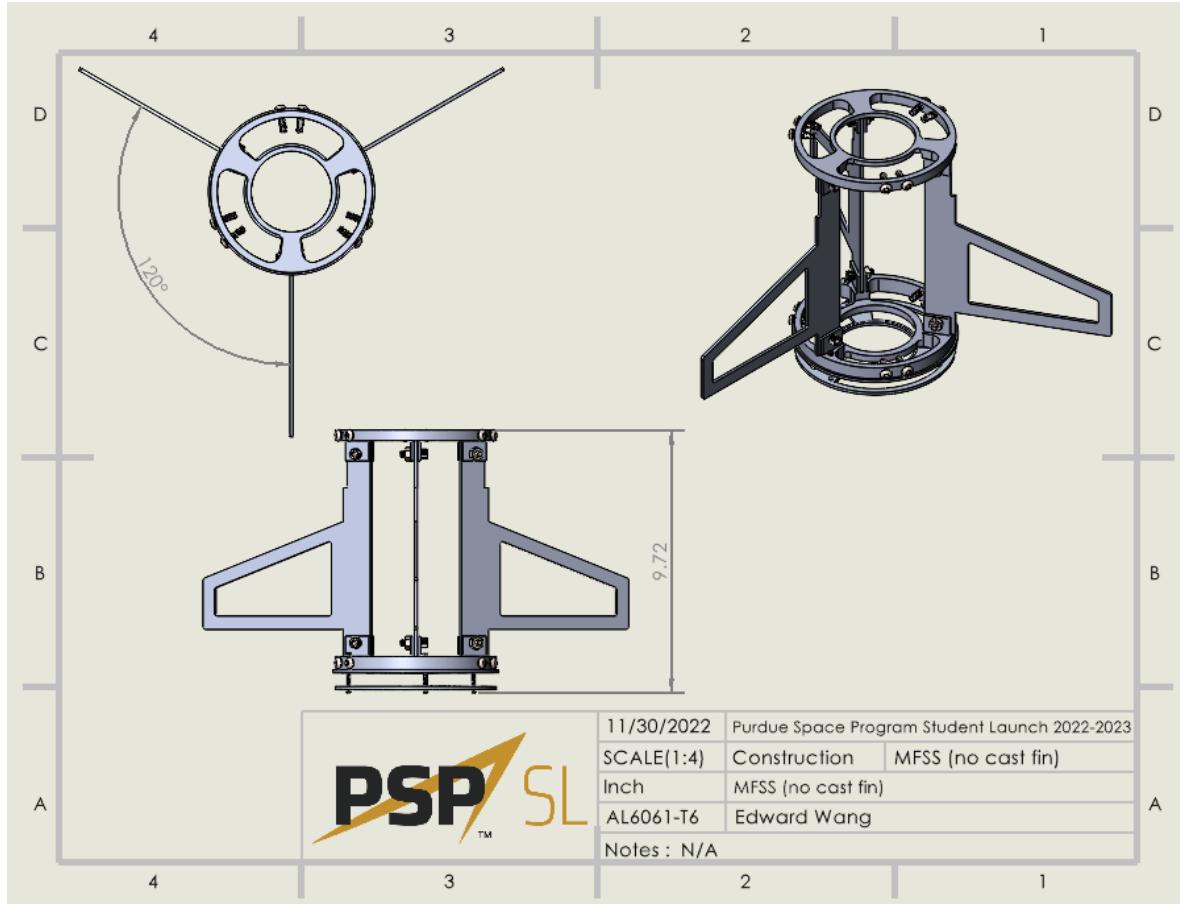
Technical Drawing for MFSS
